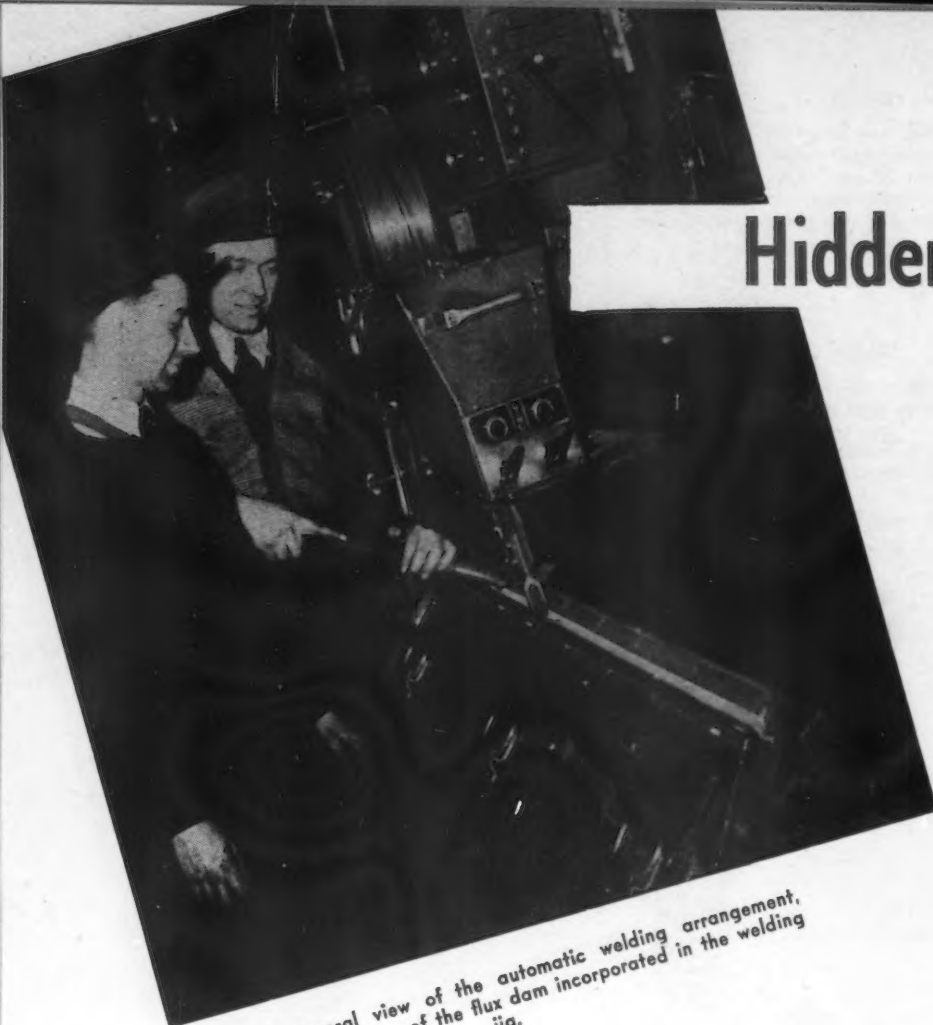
General view of the automatic welding arrangement, showing the function of the flux dam incorporated in the welding jig.
